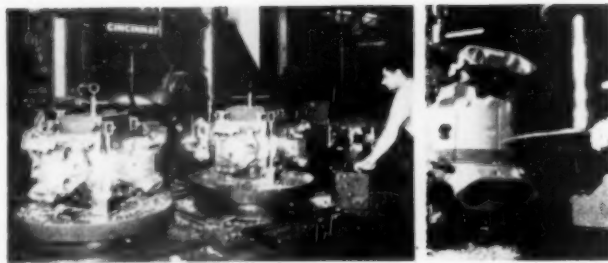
A, at left, is a Hydrotel type machine equipped with two holding fixtures, each mounting four parts, which rotate and feed the work into the saws. The saws are 13" in diameter and run at 4000 sfm with feed about 76" per minute. FIG. 5B, at right, shows saws cutting dome fins.
